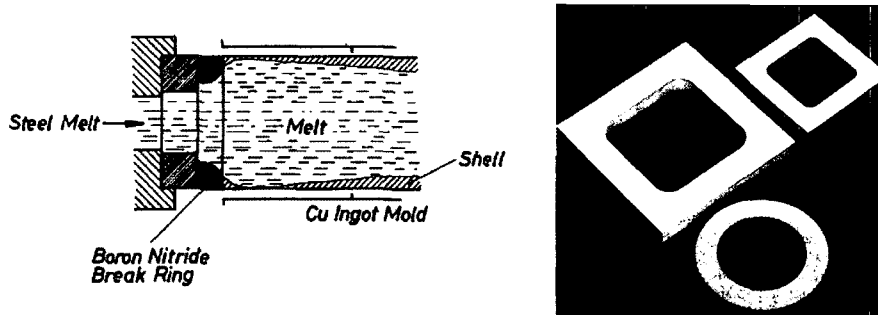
A mold for horizontal continuous casting and BN break rings.<sup>10)</sup>
